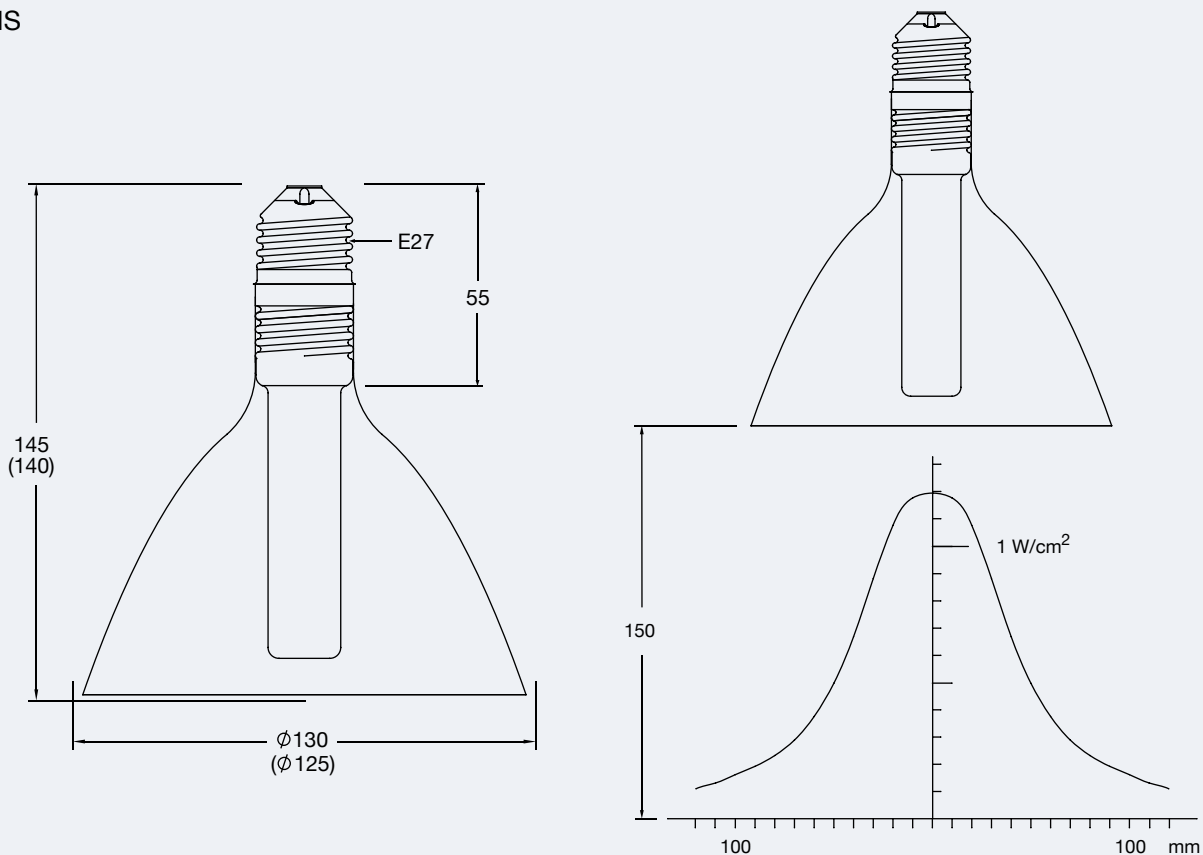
Mounting dimensions and radiator dimensions () in mm and power distribution
